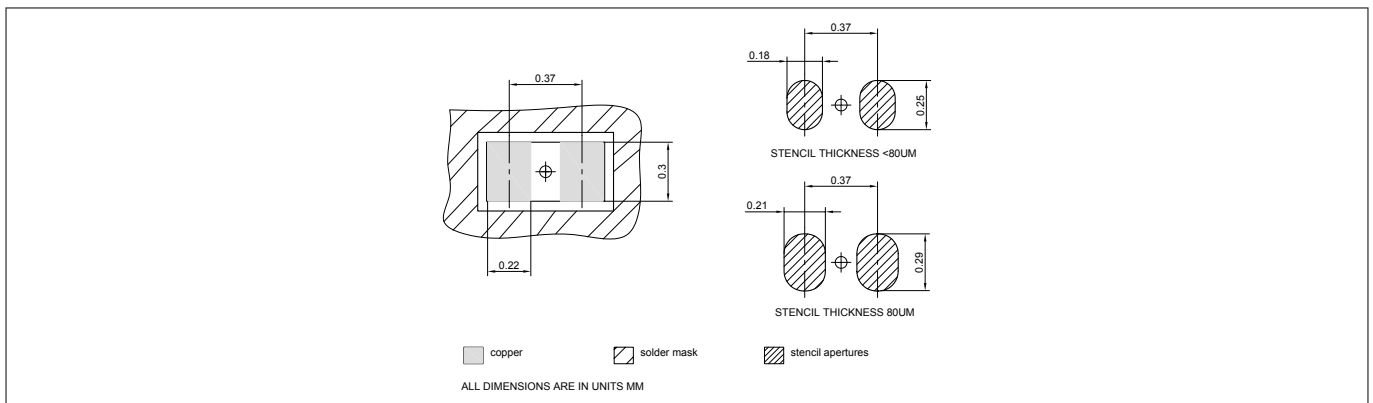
WLL-2-3 footprint (recommendation for printed circuit board assembly see [2])
